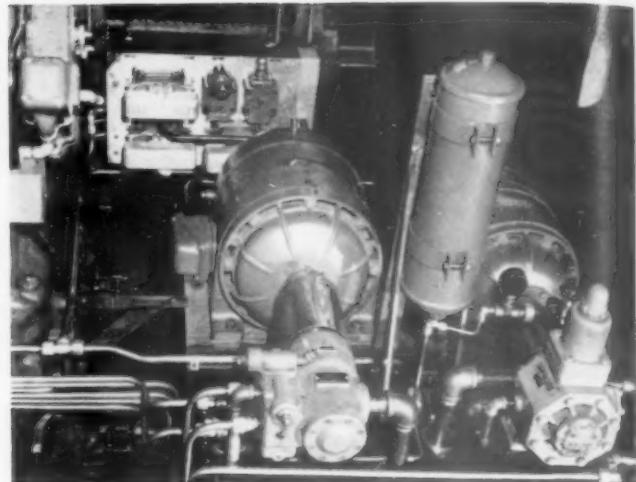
This is the same machine shown in Fig. 8, after having been rebuilt to conform to JIC standards.
